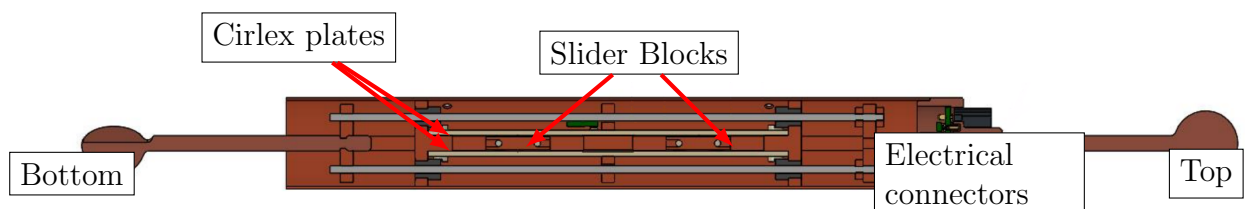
Cross sectional view of a position sensor connected to copper rods which fit into ball joints. The outer copper tube contains a dynamic arrangement of capacitors. The cirlex plates contain the electrodes which form these capacitors. Copper slider blocks move when the sensor is extended or compressed and form a different arrangement of capacitors. The spring attachment (not shown) fits onto the bottom half ball joint support.
